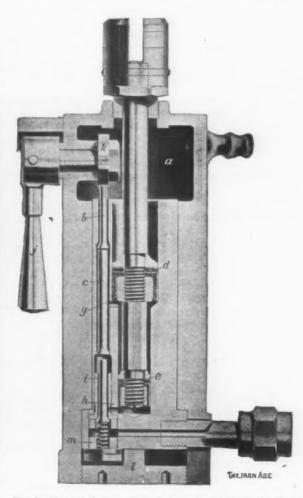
Vertical Section of the Dudgeon Hydraulic Testing Pump.
